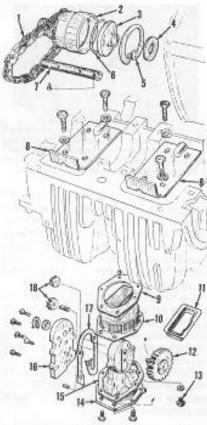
Exploded view of oil pump and centrifugal oil filter unit.
